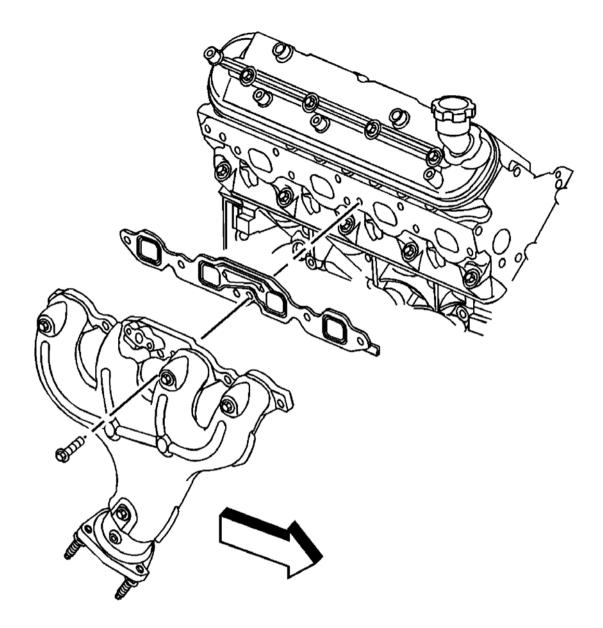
Right Exhaust Manifold, Bolts & Gasket Courtesy of GENERAL MOTORS CORP.
